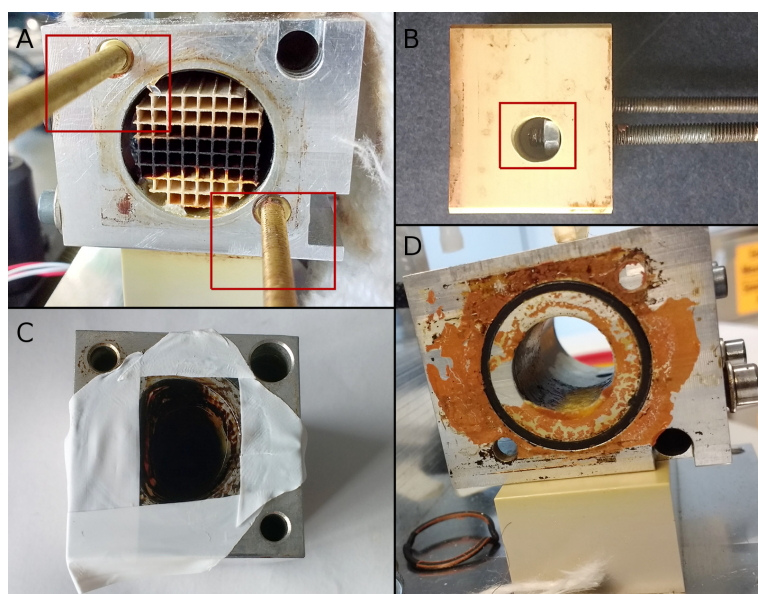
Modification of the L-Type HT-CPC to improve its leakproofness: A) To prevent the gap in the saturator block, the M4 screw holes were enlarged and M6 tapped to ensure a better hold of the brass studs due to the larger thread depth. B) In case of the condenser block, additional bolt nuts were used to secure a sufficient clamping pressure. C) PTFE sealing tape was used between all components. D) An attempt to seal the L-Type with a gasketing paste was not practicable.
